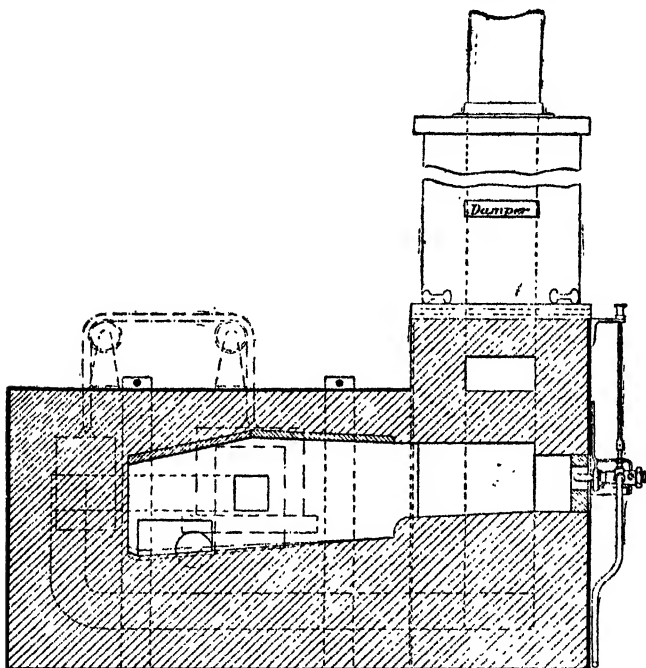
Longitudinal section of Holloway's smelting furnace.
